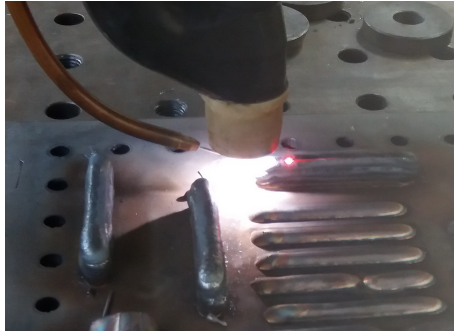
A plasma arc welding process showing the metallic wire and the torch.
